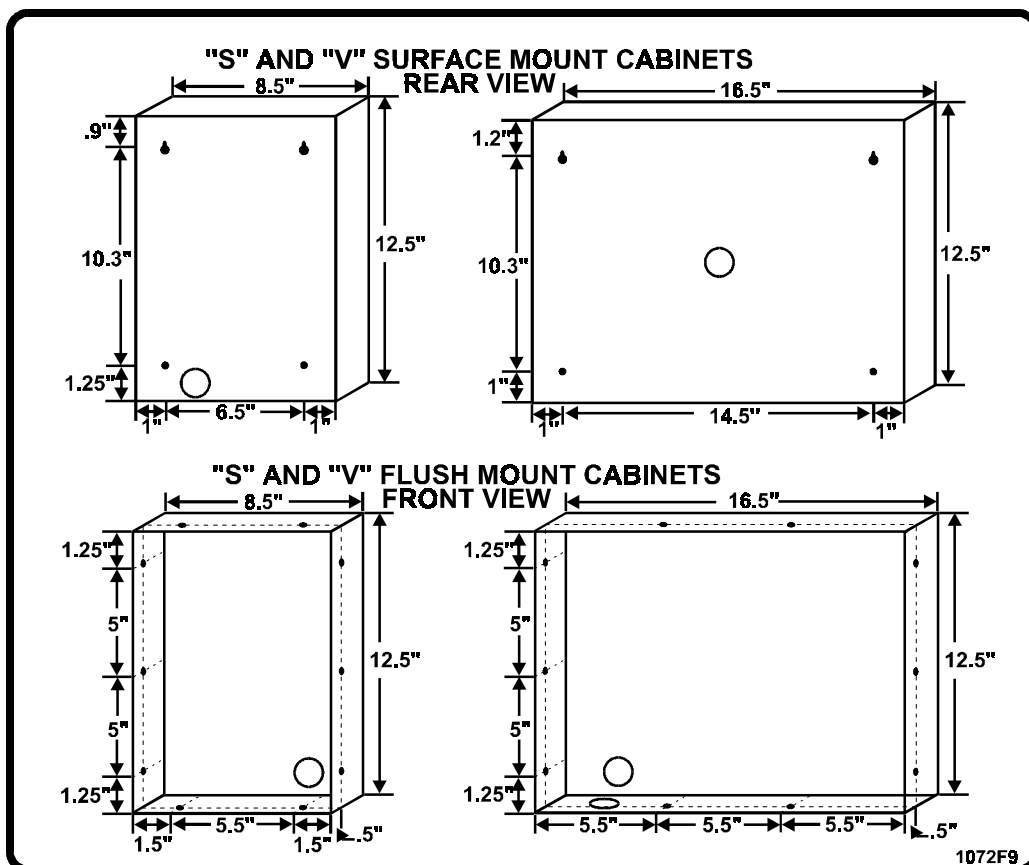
Mounting Ovation "S" and "V" Cabinets.
